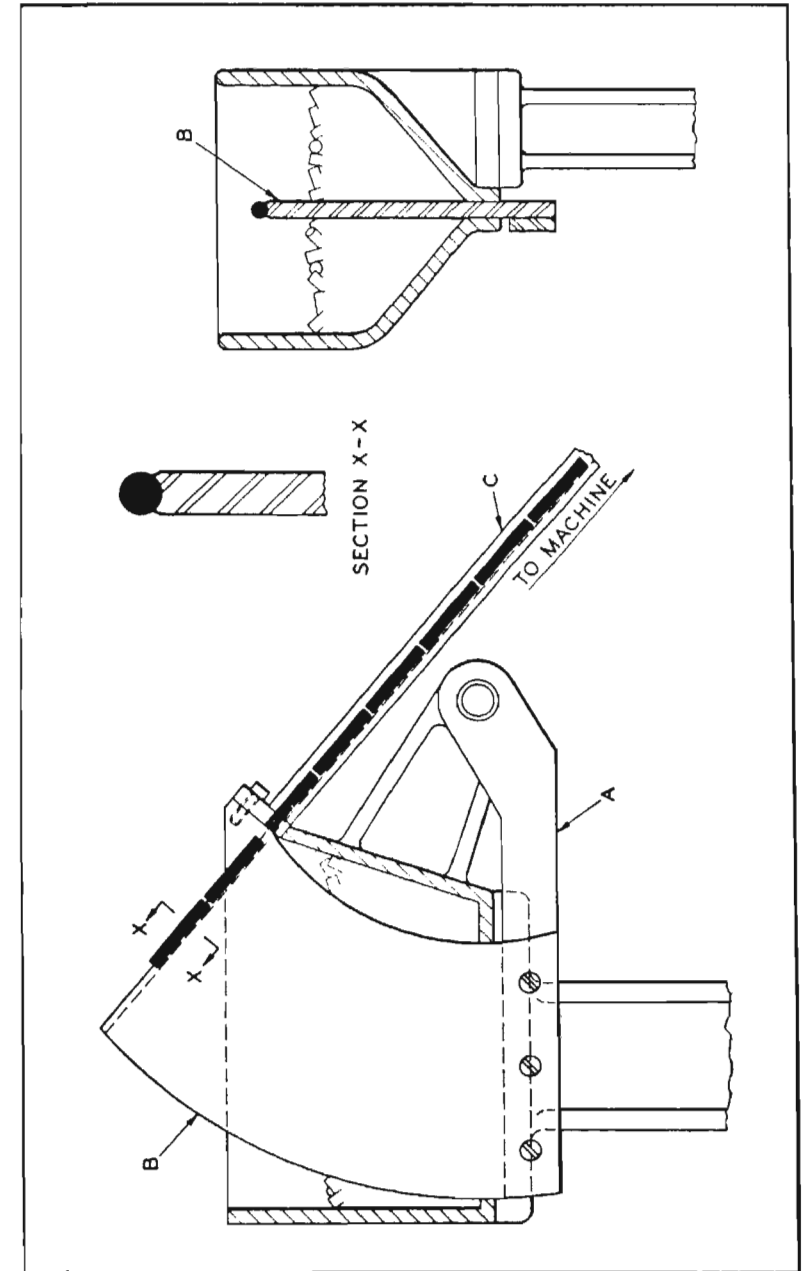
Centerboard Hopper for Picking Up Rod-shaped Work or Parts of Angular Cross-section.
